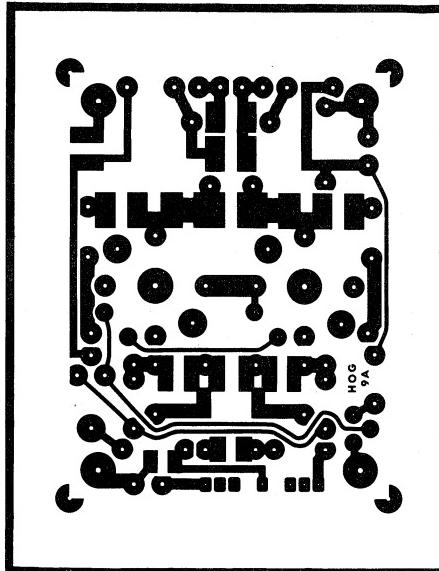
PCB Layout of 20 W, 55 dB High-Performance Driver
